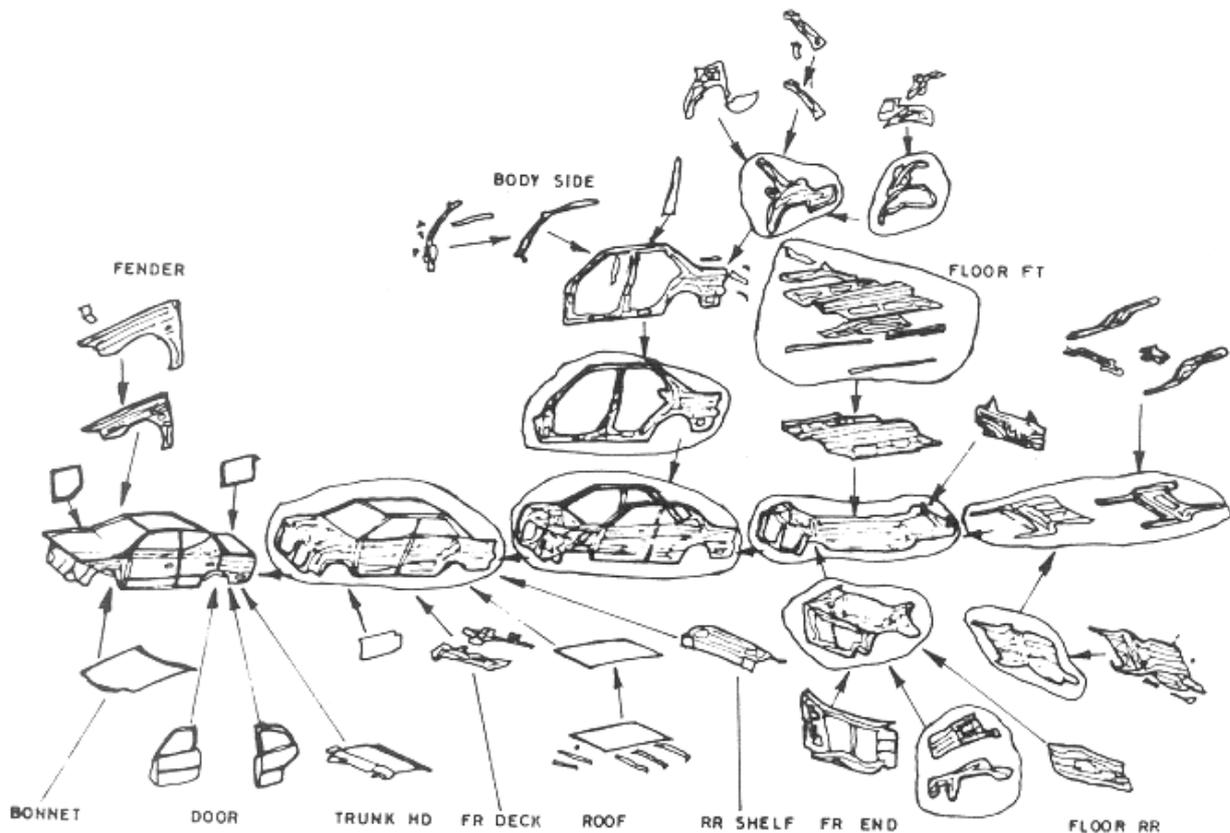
Sequences of Sub-Assemblies and Main Body Welding
